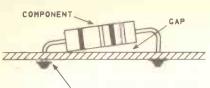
Fitting a through-pin with the aid of a soldering iron.
